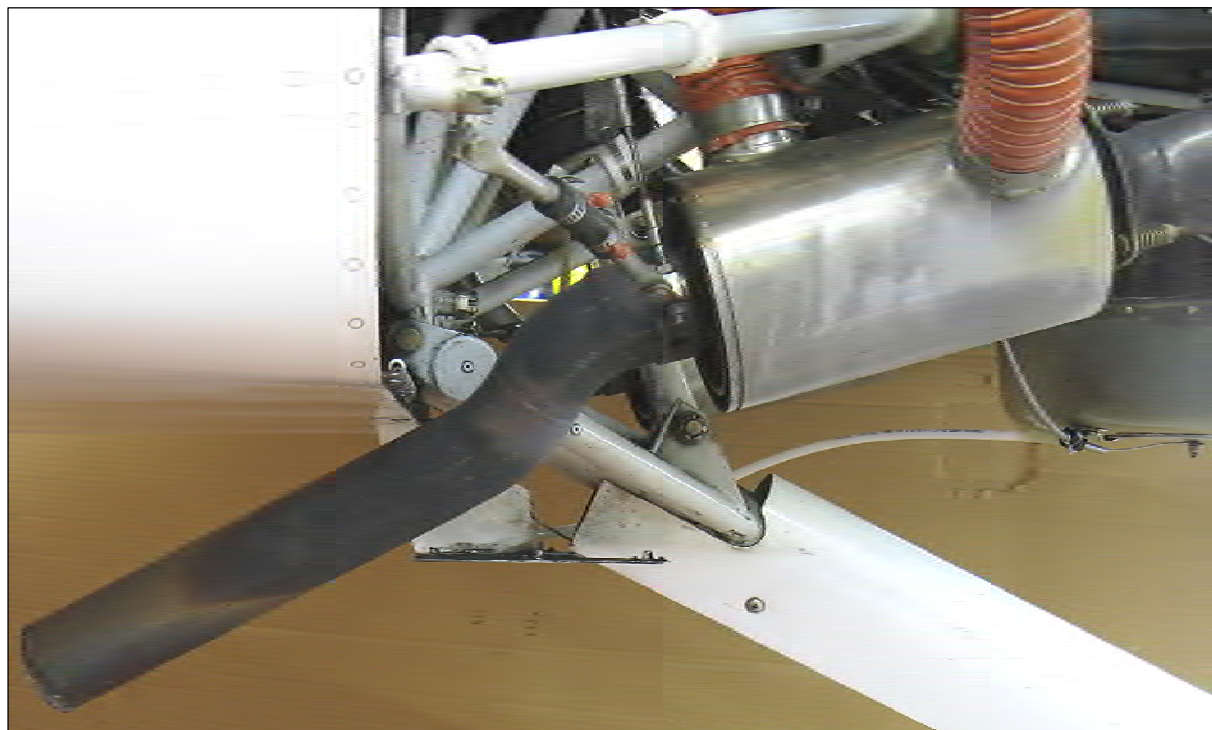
MUFFLER BRACING & SUPPORT - LEFT SIDE
